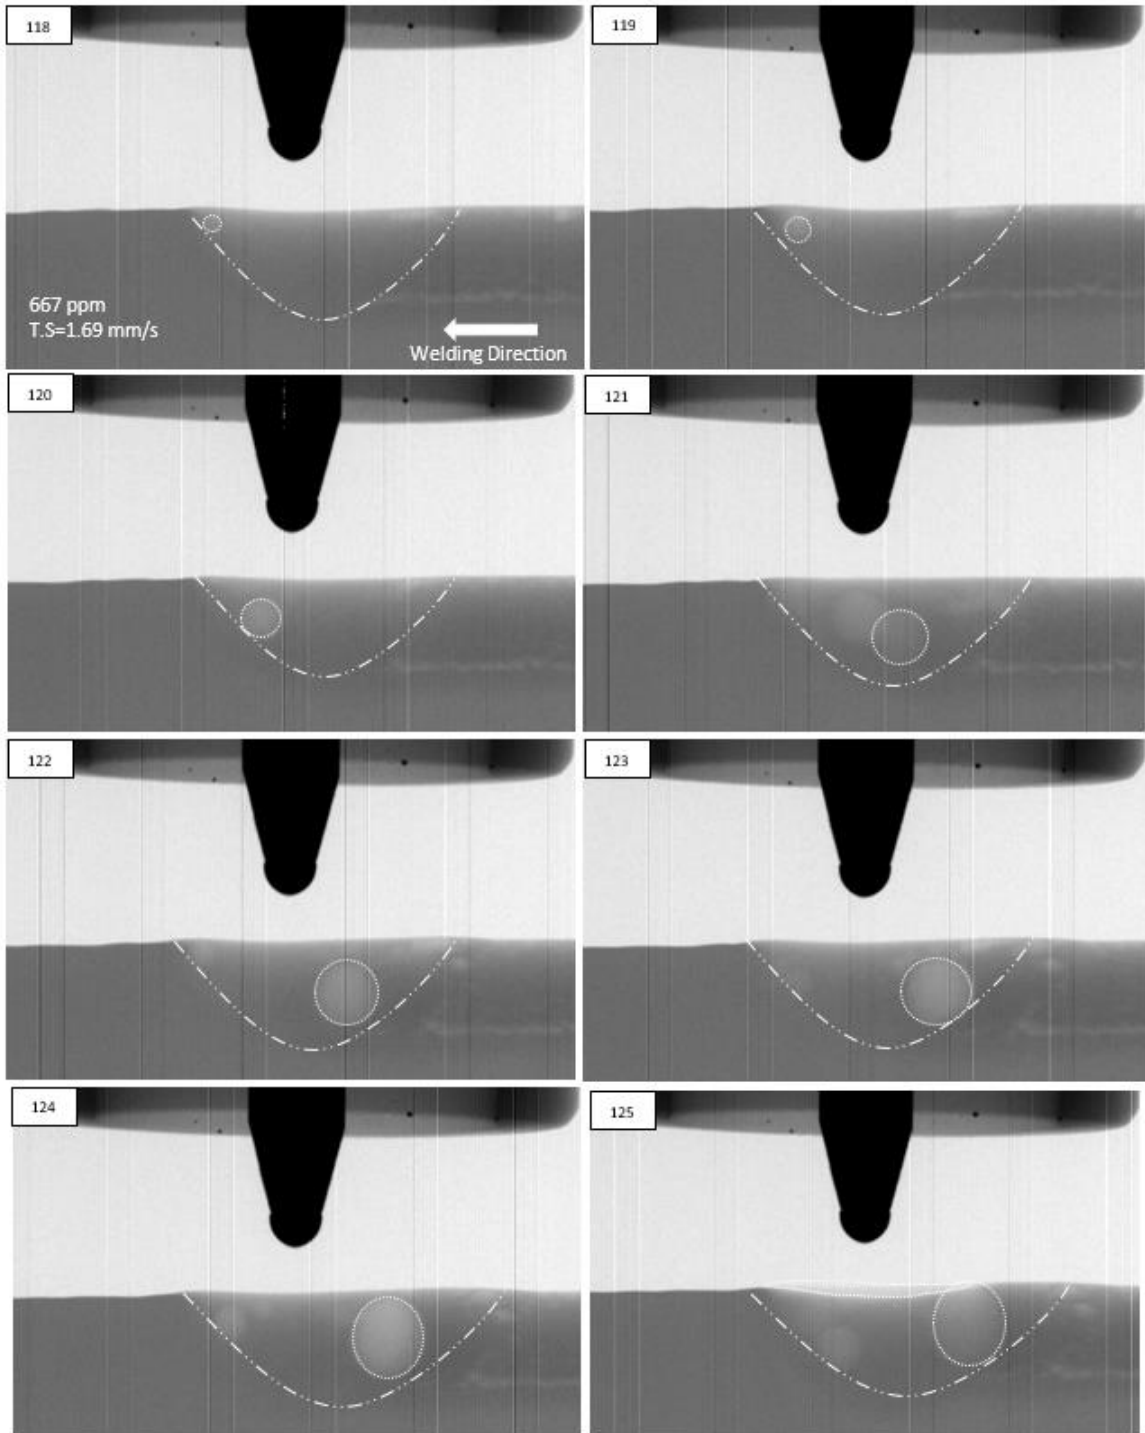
Alloy 6061 welded sample using 667 ppm shielding gas hydrogen at a travel speed of 1.69 mm/s, shows pore escaping in the final frame and a steady stream of micro-pores solidified in the weld metal.
